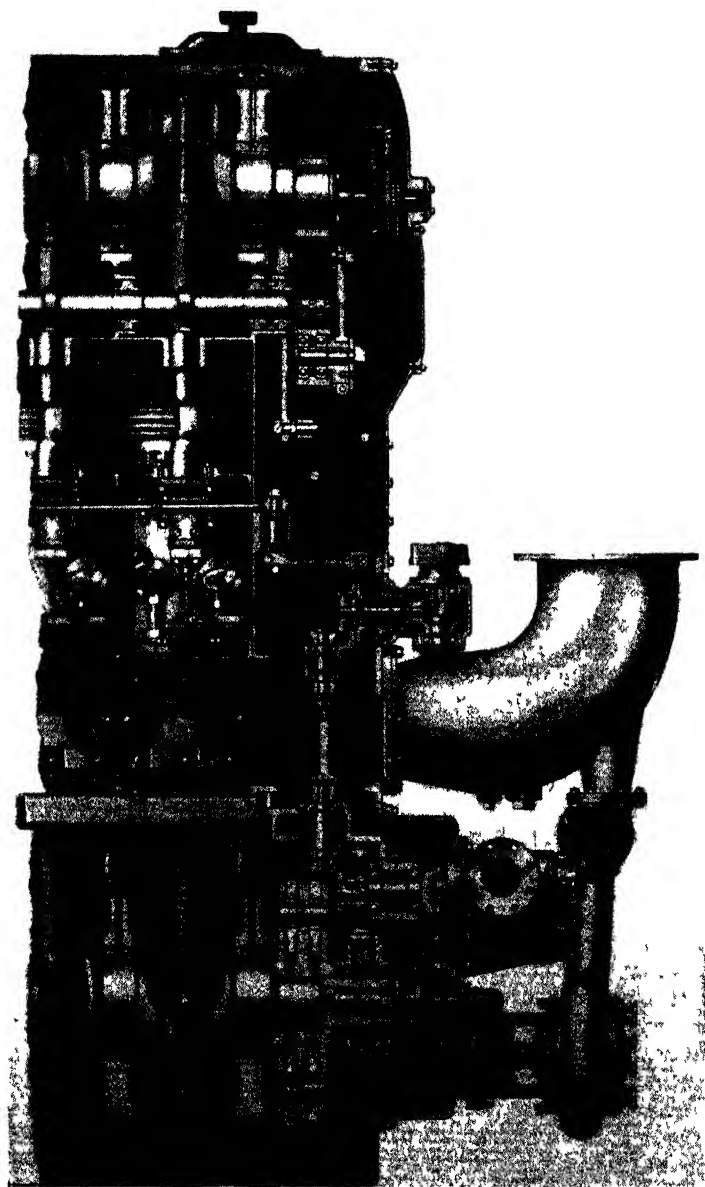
CONTROL END OF FAIRBANKS-MORSE ENGINE, SHOWING INJECTION PUMPS, TORSION DAMPER, AND OTHER DETAILS.
